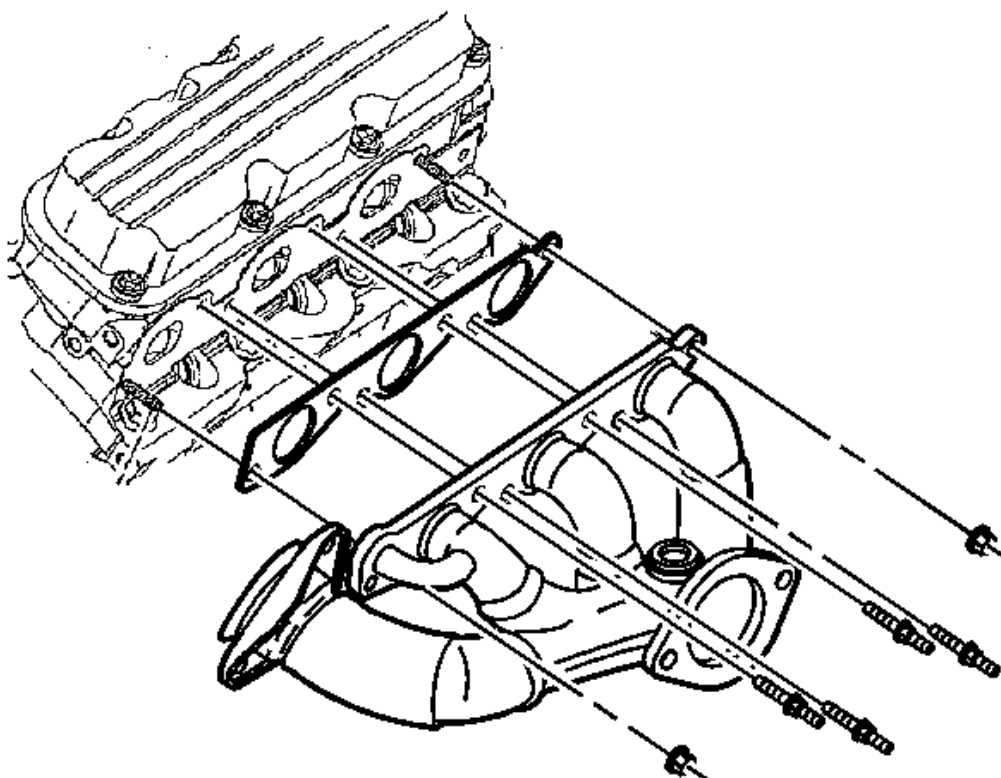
Installing Right Exhaust Manifold (Without A.I.R.)
